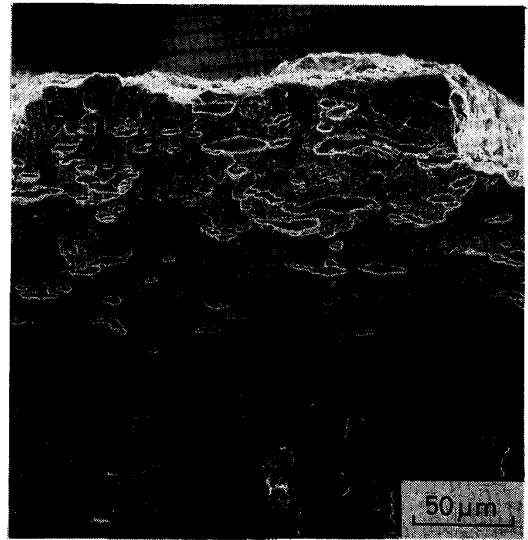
Initiation sites of fracture in fretting fatigue specimens shown in Fig. 3, 4 and 5.
